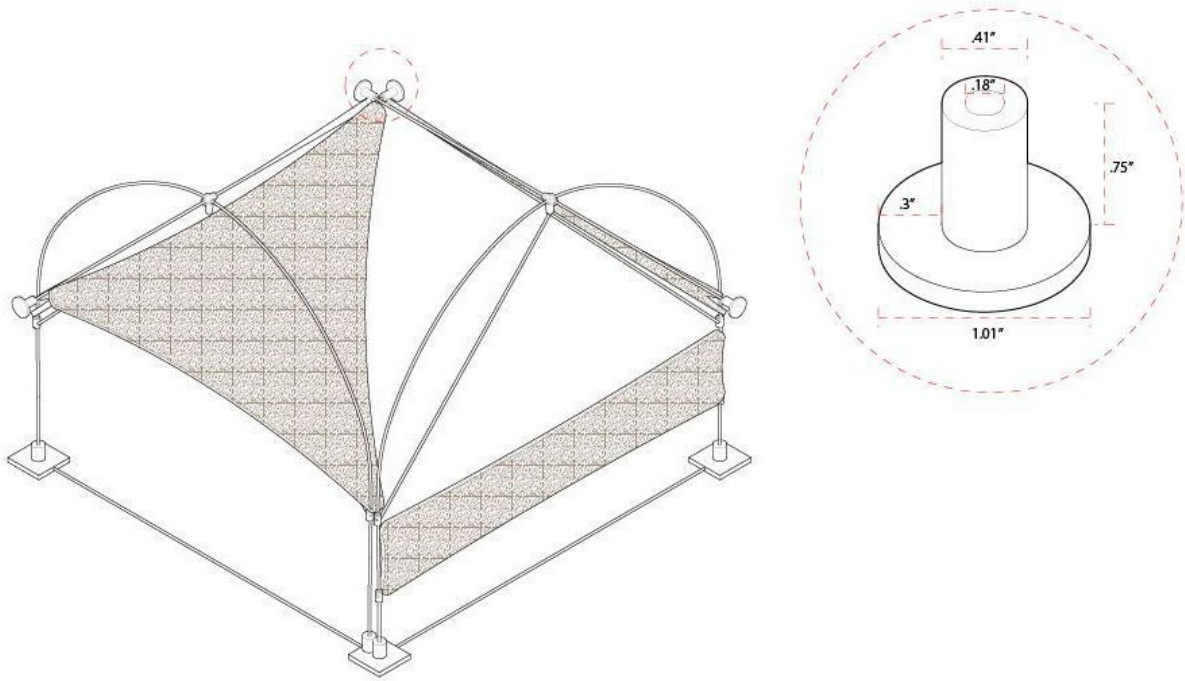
Coconut coir knit textiles added to frame with cap detail
